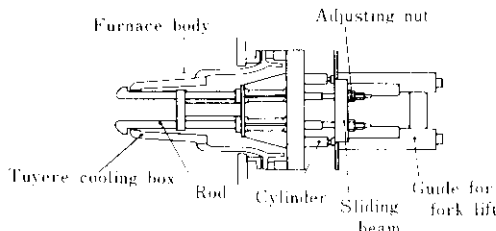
Schema of Tuyere cooling box pulling-out machine
